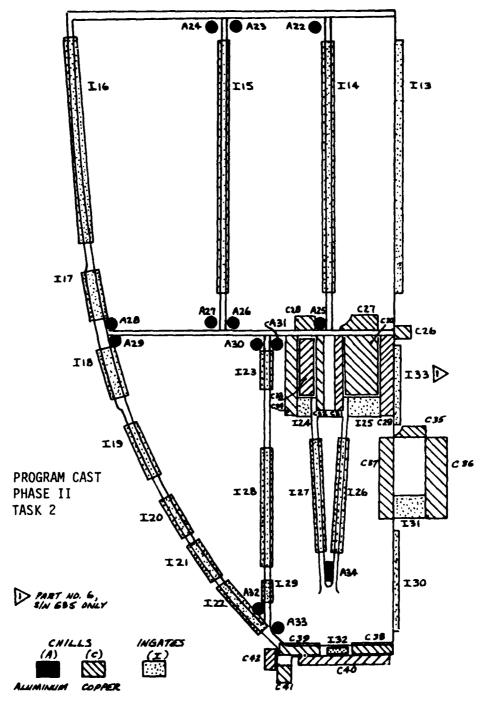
AFT FACE, BOEING PART A CASTINGS
